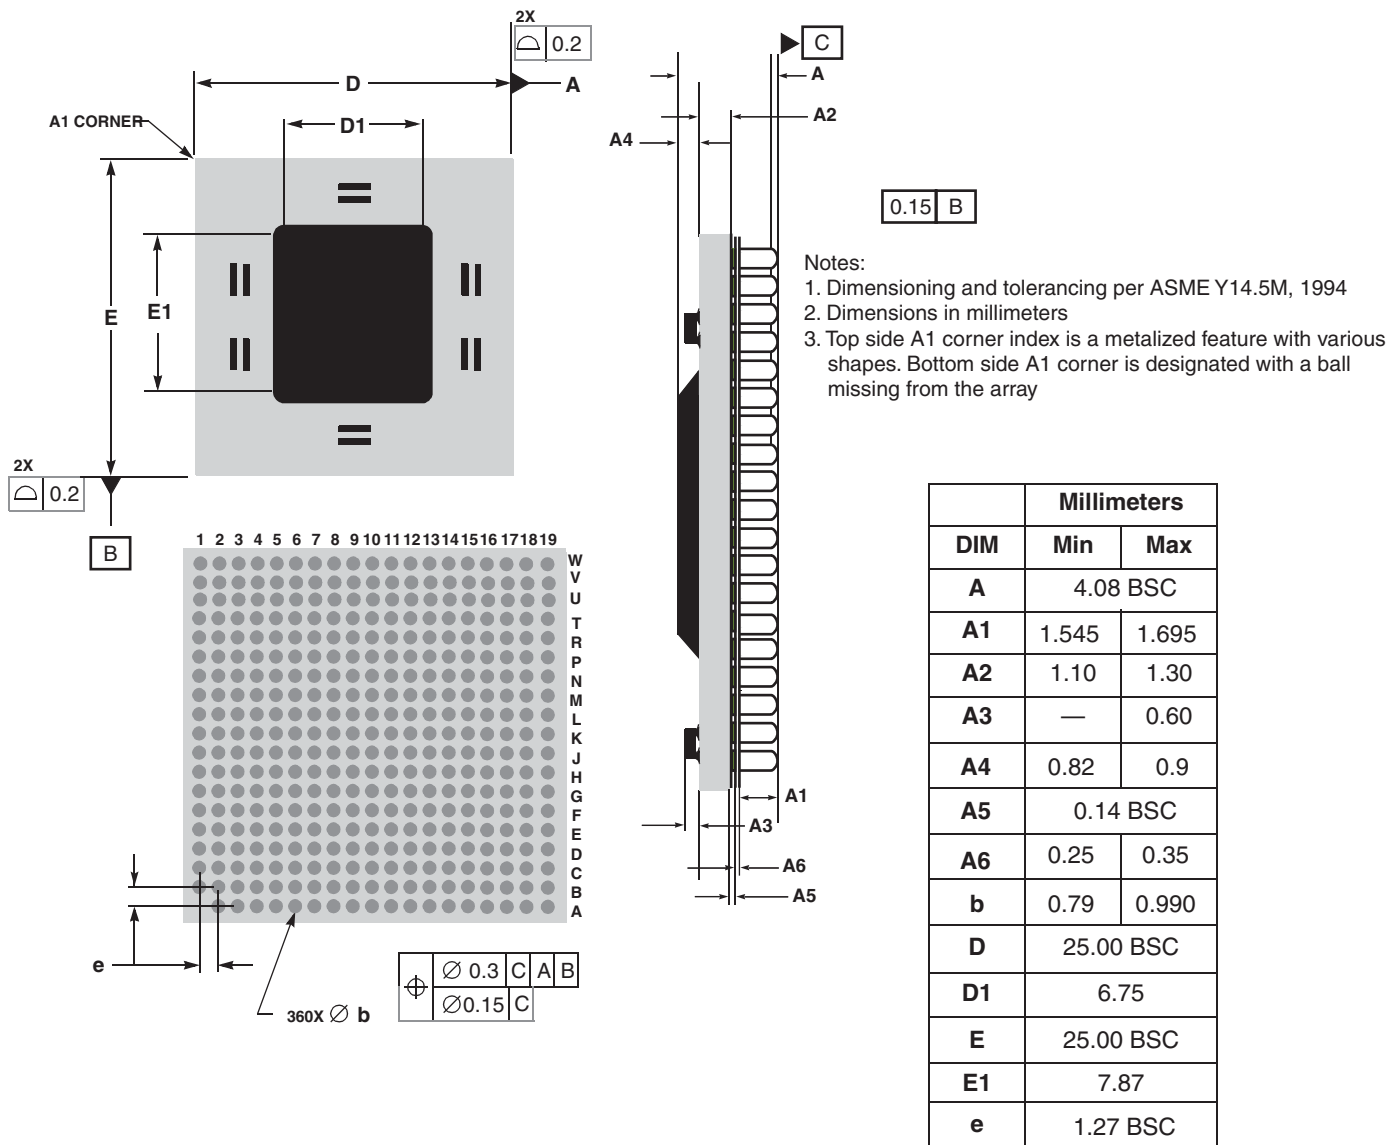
Mechanical Dimensions and Bottom Surface Nomenclature of PC755 (HiTCE)
